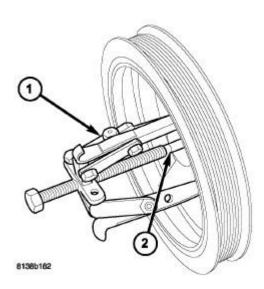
Removing Crankshaft Damper Courtesy of CHRYSLER LLC
